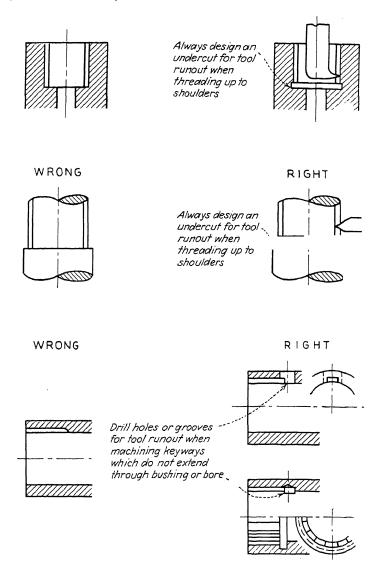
Bad and good in machining practice. A number of situations that arise in machining practice, in which common errors are shown beside a more satisfactory setup. (*Product Engineering.*)
